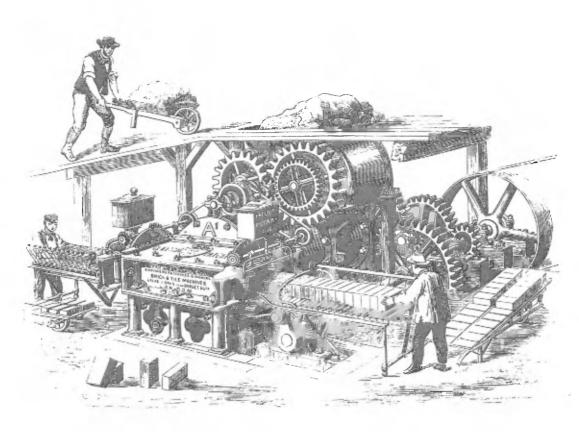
By the early 1860s brickmaking machines could be elaborate. Clayton's brickmaking machine of 1863 allowed clay to be fed in at the top between a pair of rollers and extruded on both sides. Each column was cut by a wires on a hand-operated frame from which the green bricks were loaded on to the hack barrows. The tanks contained water, used to lubricate the clay columns.
